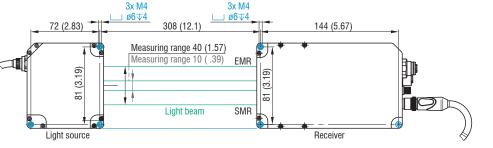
Light source and receiver ODC2700-40(002) with mounting rail, dimensions in mm (inches)
